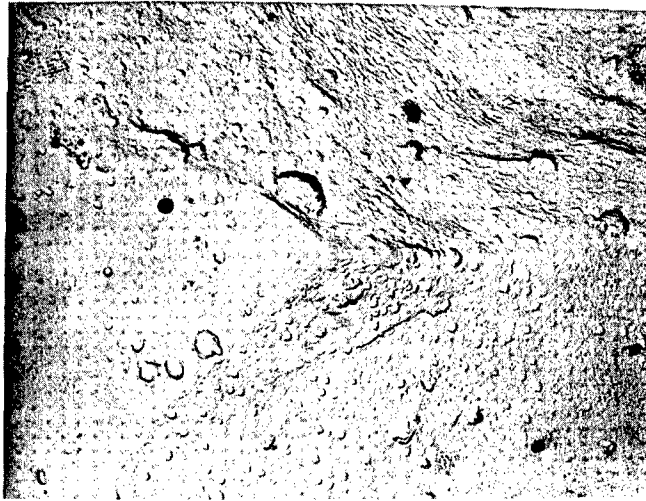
Electron Fractographs of Leaded Steel Showing a D Type Fracture Near the Origin of Cracking. Note That the Fracture is Completely Intergranular. (4,000X)
